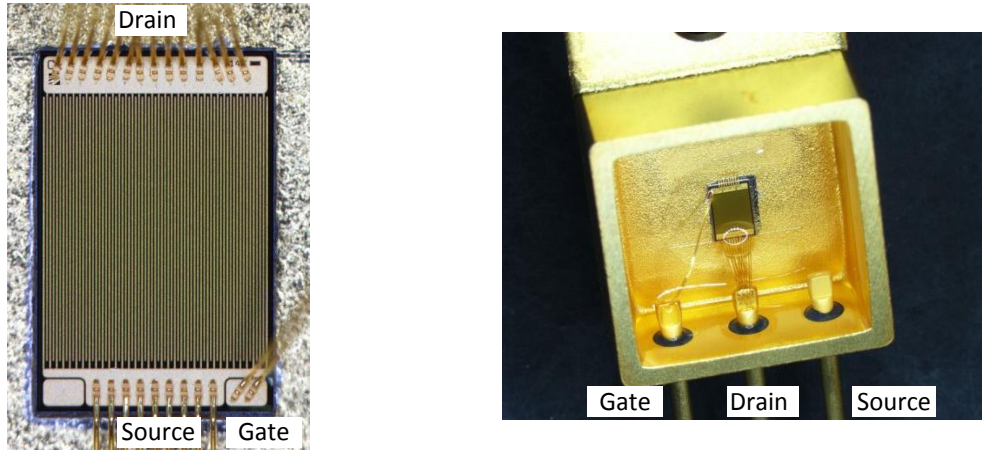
Assembly technology of the device-demonstrator (Left) Chip assembly on the package base plate by gold-tin solder die attachment and with $50 \mu\text{m}$ diameter bond wires interconnection technology. (Right) The chip is assembled in a TO258 engineering package with conventional pin assignment.
